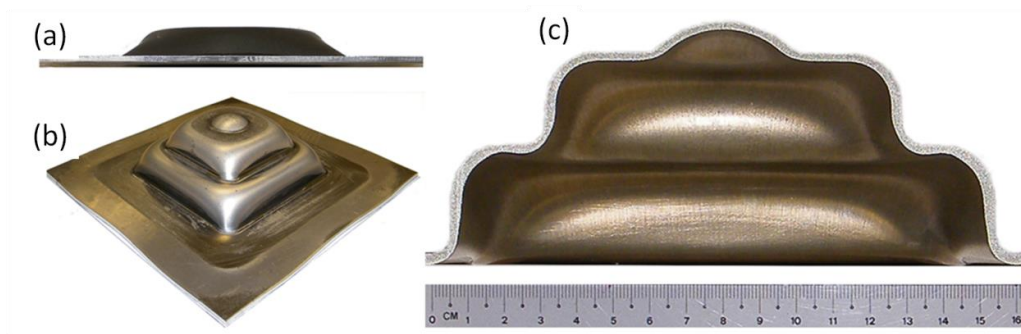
Photographs of AA5083 sheet formed at 400 °C: (a) hot drawing part – side view, (b) formed part – top angle view and (c) cross-sectional part – side view.
